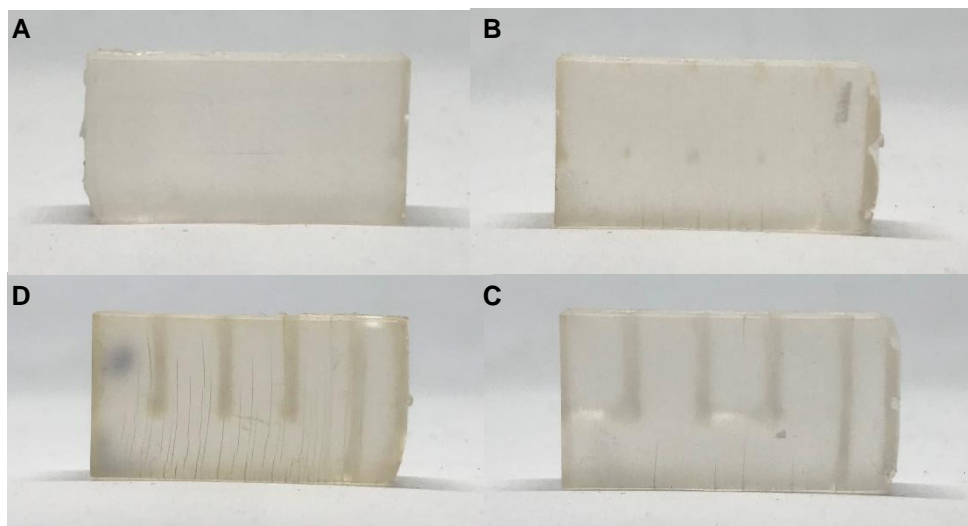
A) Test segment print with 0.67% photo-initiator; B) Test segment print with 1% photo-initiator; C) Test segment print with 1.5% photo-initiator; D) Test segment print with 2.12% photo-initiator.
